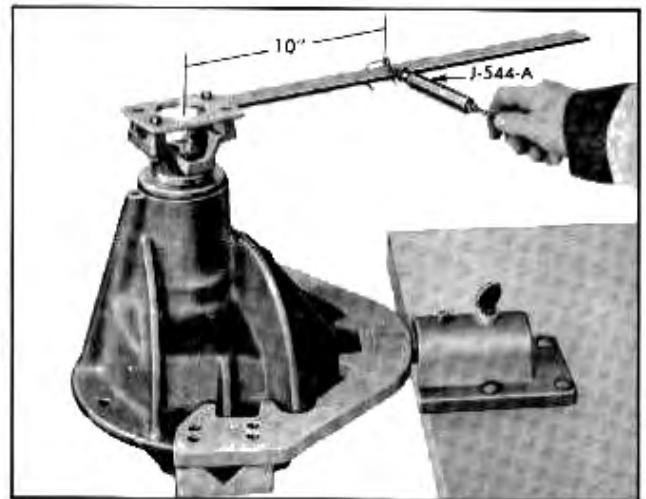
Checking Pinion Bearing Preload With Scale J-544-A
